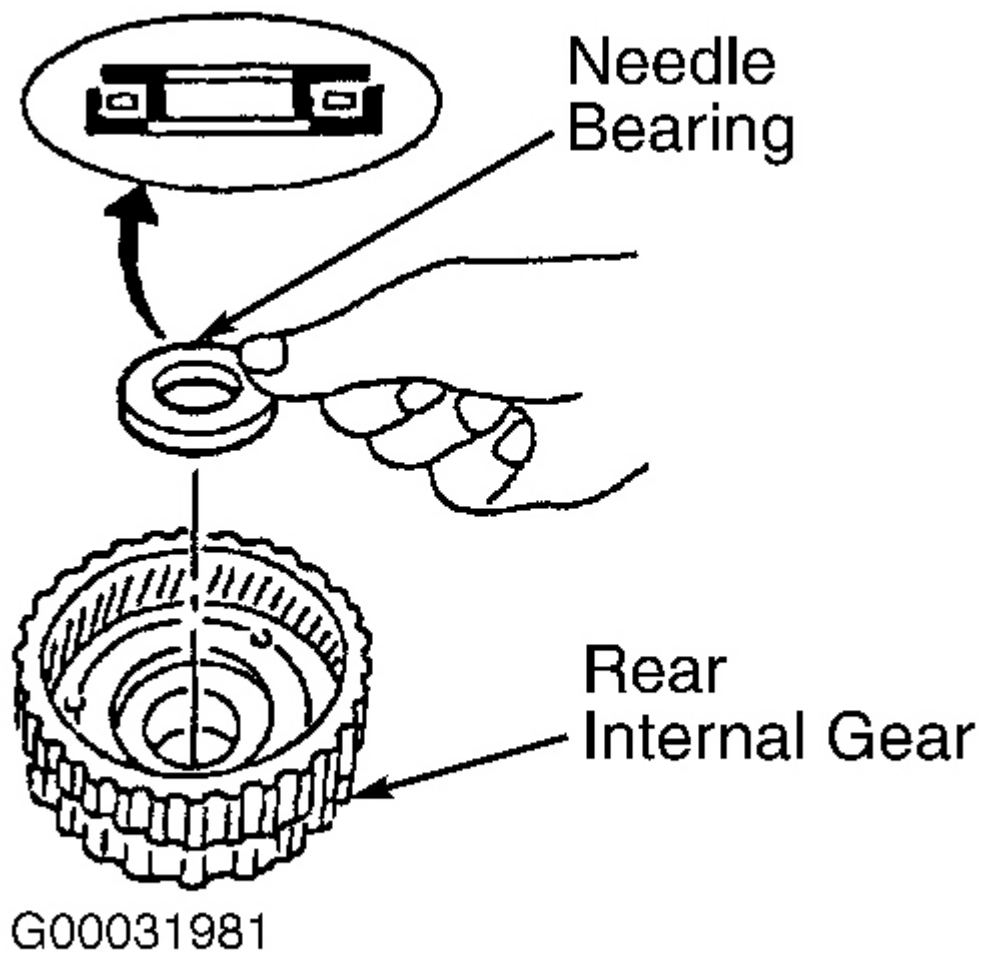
Identifying Rear Internal Gear Thrust Needle Bearing Location
